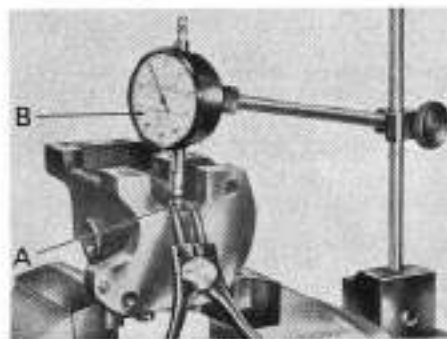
View showing dial indicator being used to adjust traction control valve; refer to text for procedure.
